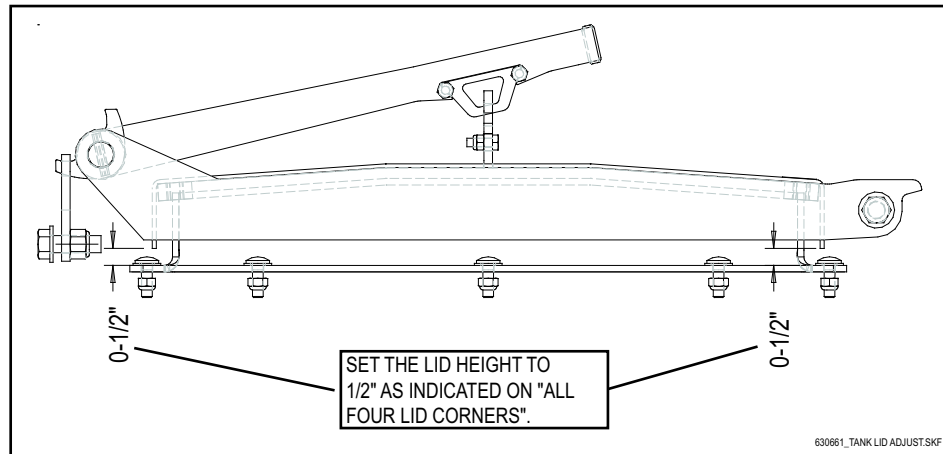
Tank Lid Assembly - Distance Set (Small Lid Shown)
